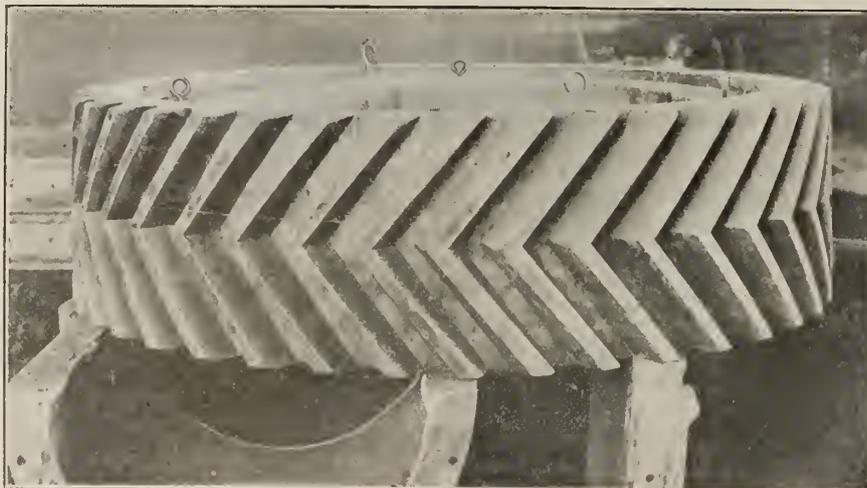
PATTERN OF LARGE HERRING-BONE GEAR.
